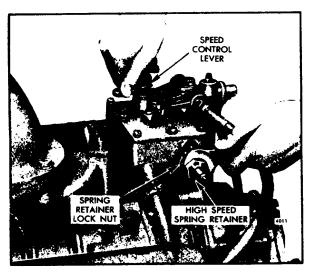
Adjusting Maximum No-Load Engine Speed
